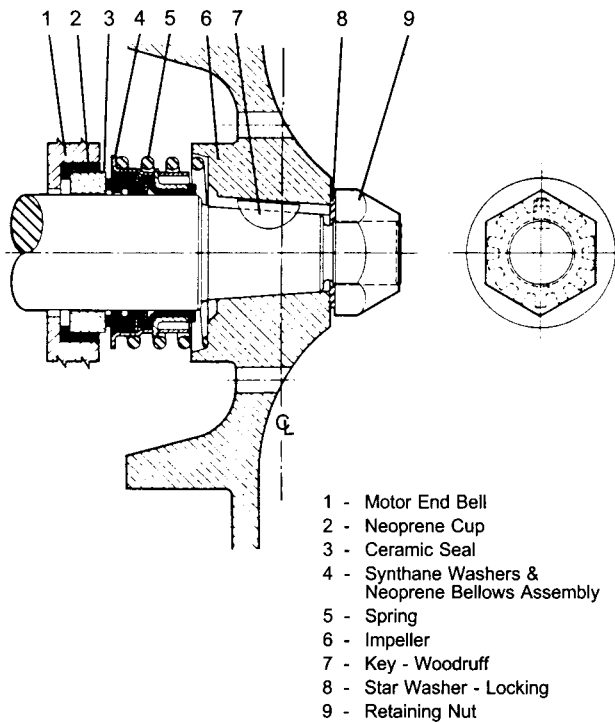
SHAFT EXTENSION AND SEAL ASSEMBLY
